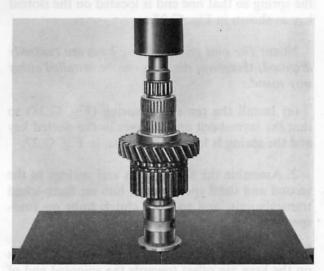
Pressing the first speed gear sleeve on to the mainshaft (four-speed)
